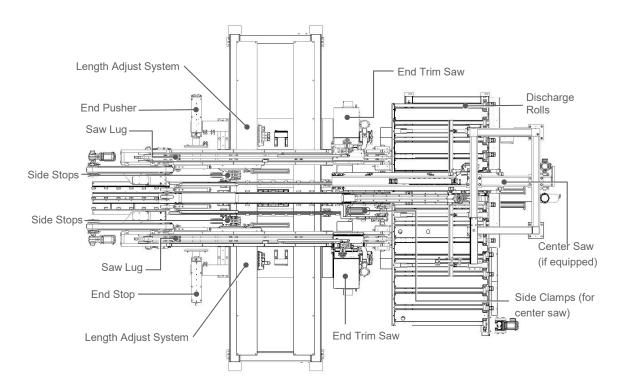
Part Identification (Top View) (this is a representative drawing, some equipment models may vary in appearance)
